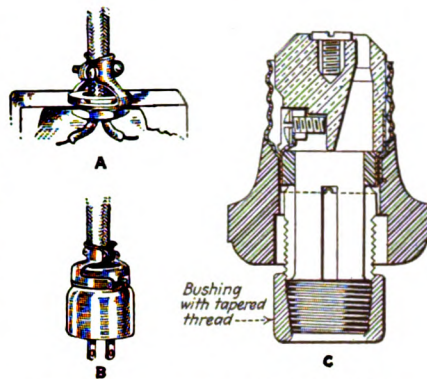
The cord is firmly held by a clamping device as it enters these fixtures.
